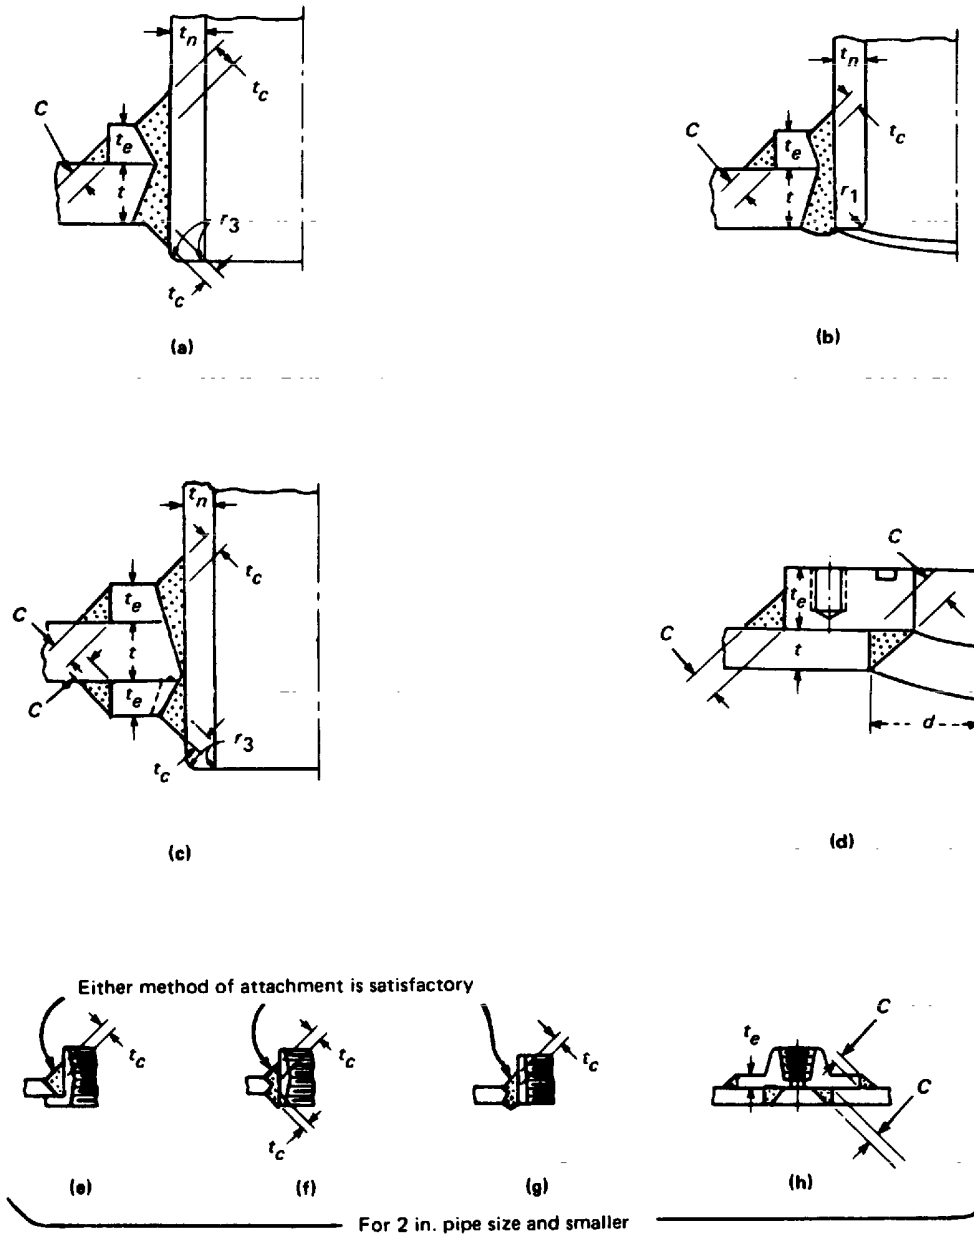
(c)-1 PAD AND SCREWED FITTING TYPES OF WELDED NOZZLES AND OTHER CONNECTIONS TO SHELLS, DRUMS, AND HEADERS
